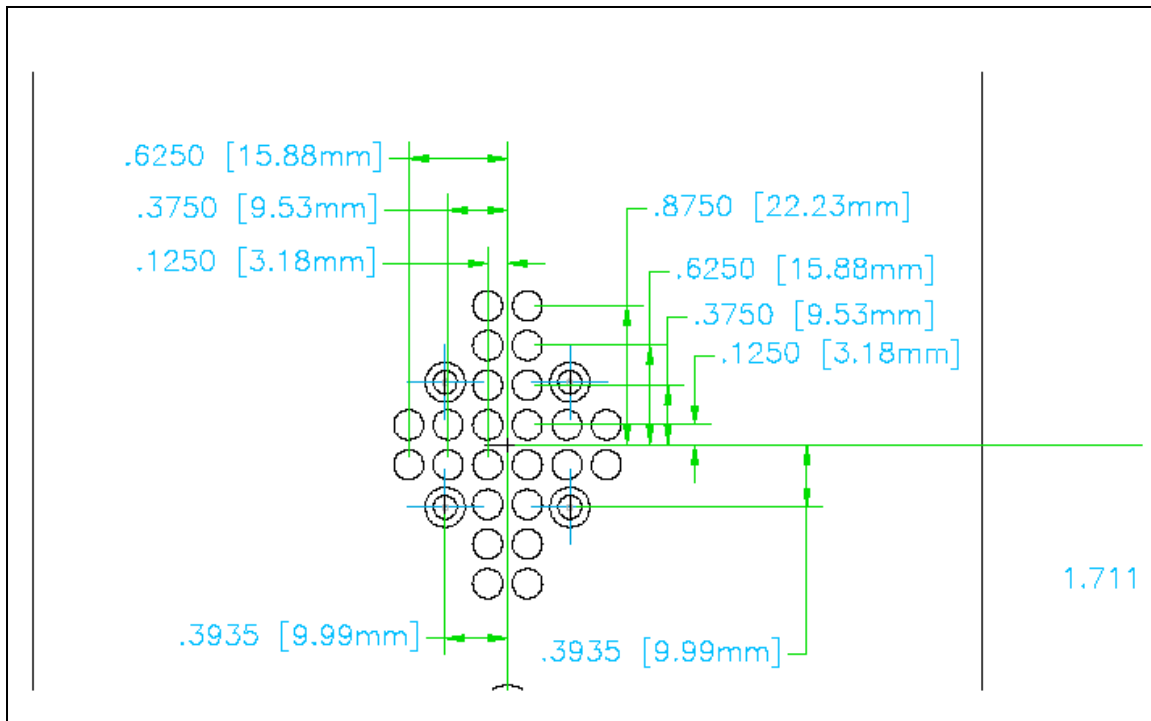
(d) Details of design for holes on three sides of payload body for fan and air inlet
